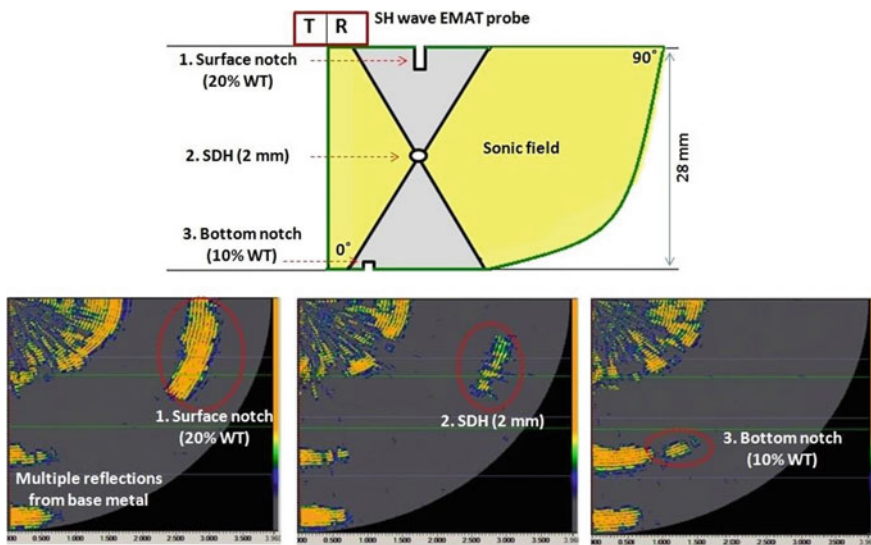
Schematic diagram of the test set-up and sector scan images obtained from the first mock-up sample with defects on both sides of the weld
